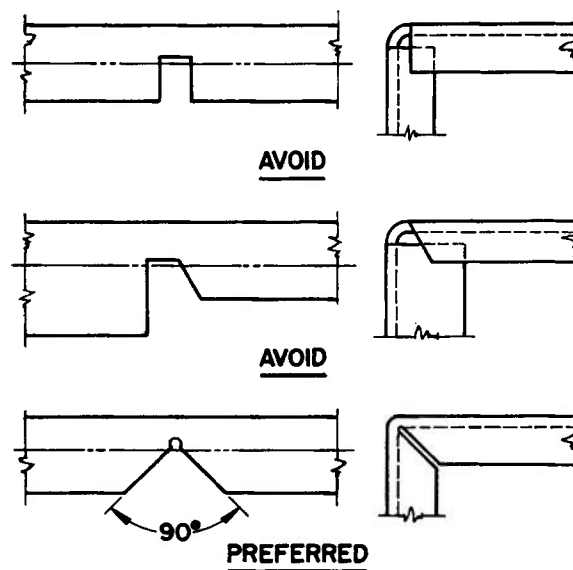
Sheet Metal Corner Construction for Welded Joints<sup>109</sup>
